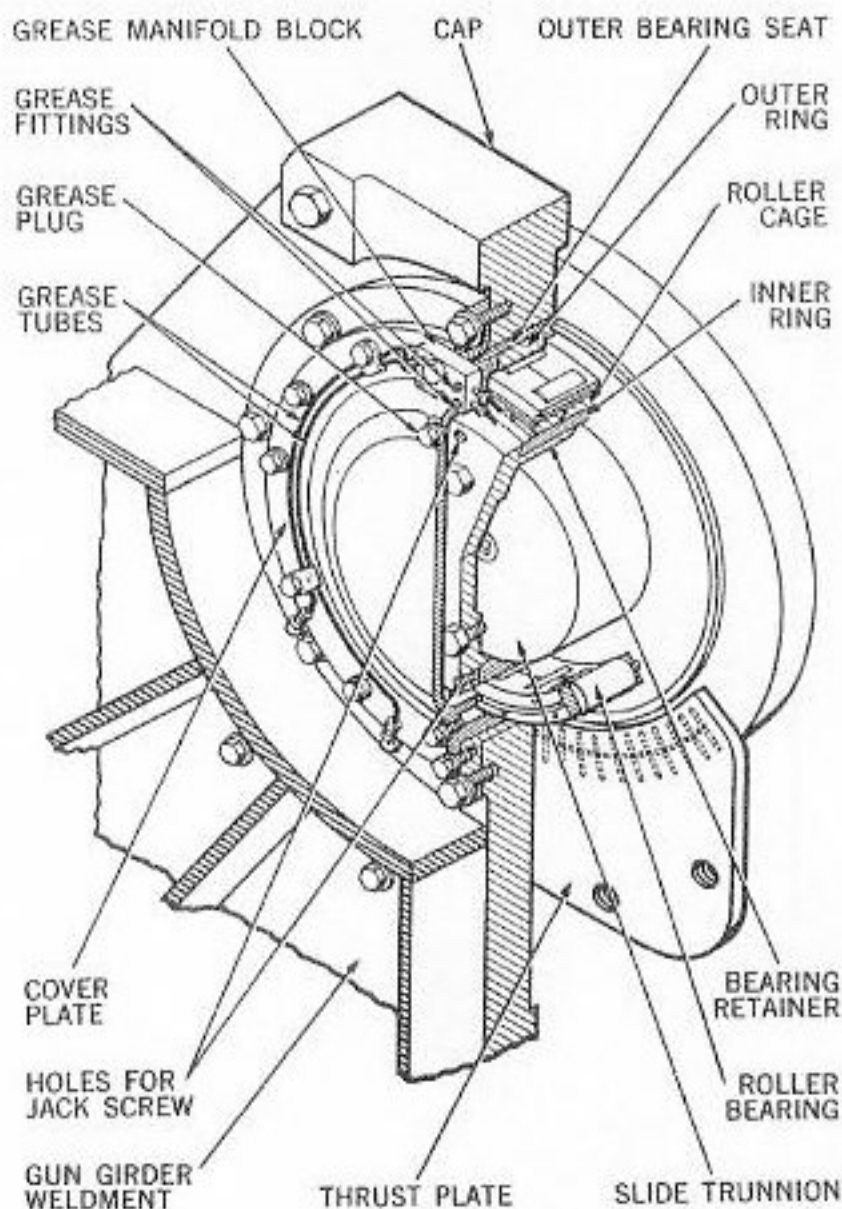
Deck Lug and Trunnion Bearing Assembly, General Arrangement
